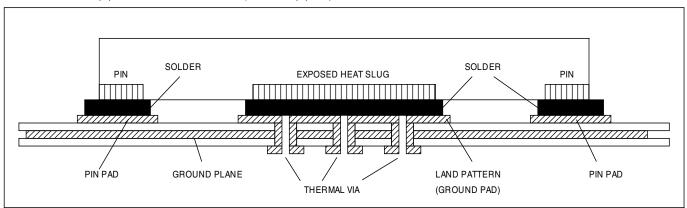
P.C.ASSEMBLY FOR EXPOSED PAD THERMAL RELEASE PATH -SIDE VIEW (DRAWING NOT TO SCALE)
